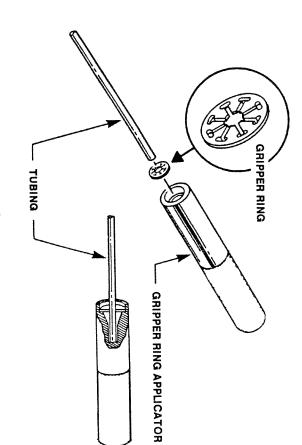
FERRULE AND COMPRESSION ASSEMBLY
